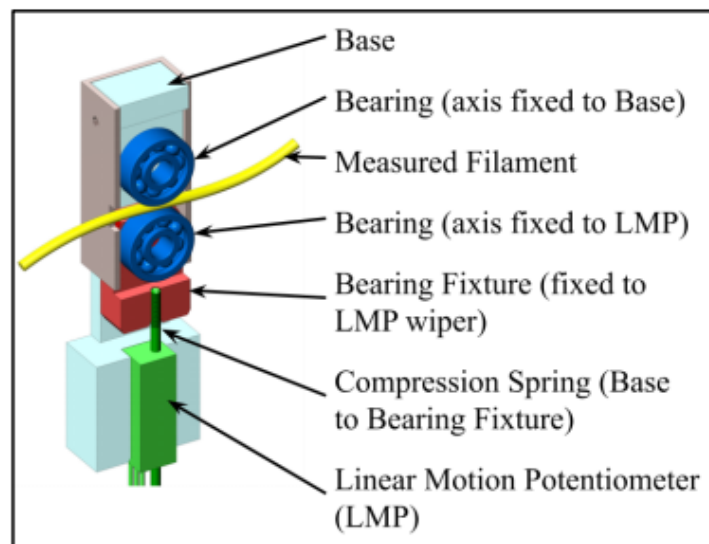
Filament diameter sensor using ball bearings and a precision linear motion
